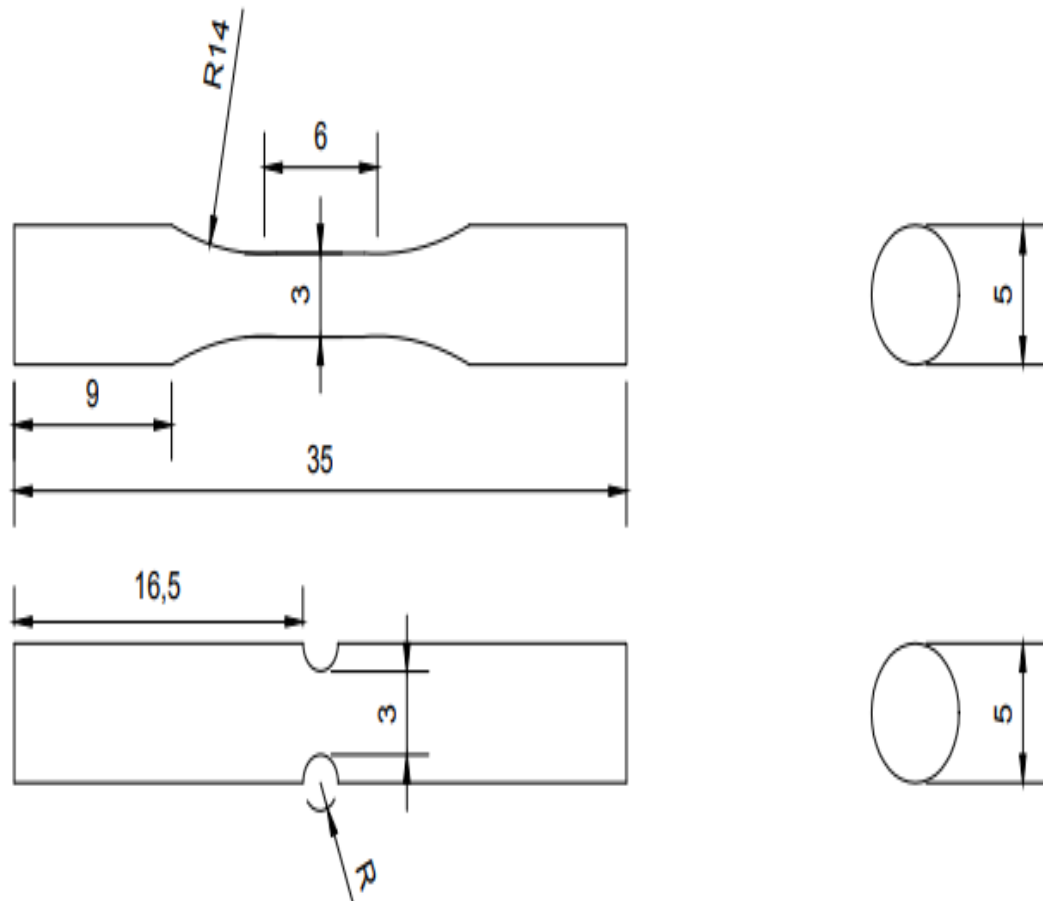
Specimen dimensions of smooth specimen and notched specimen for tensile testing (unit:mm)
